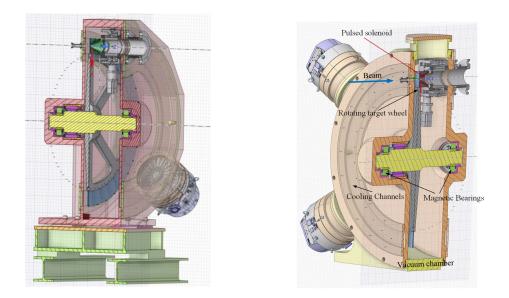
Technical drawings of the whole unit, rotating wheel and pulsed solenoid as optic matching device [15].
